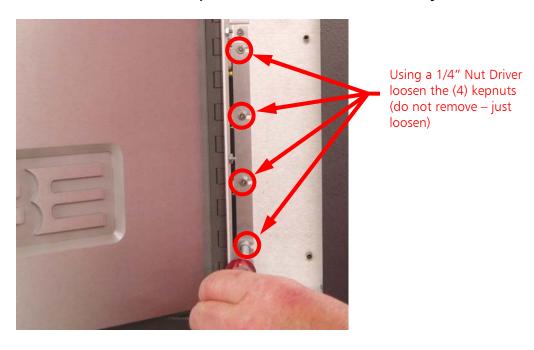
Loosen System Controller PCB Bracket Kepnuts
